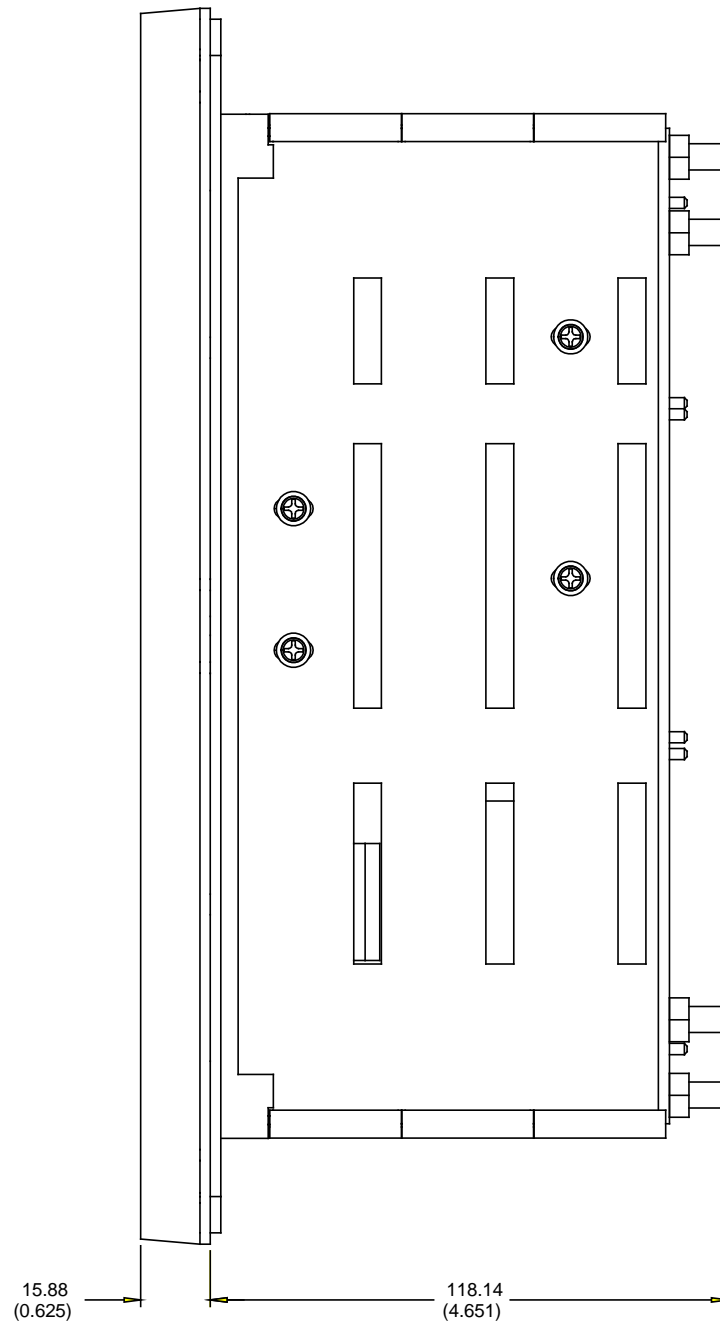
EGCP-3 Outline Drawing (side view)
